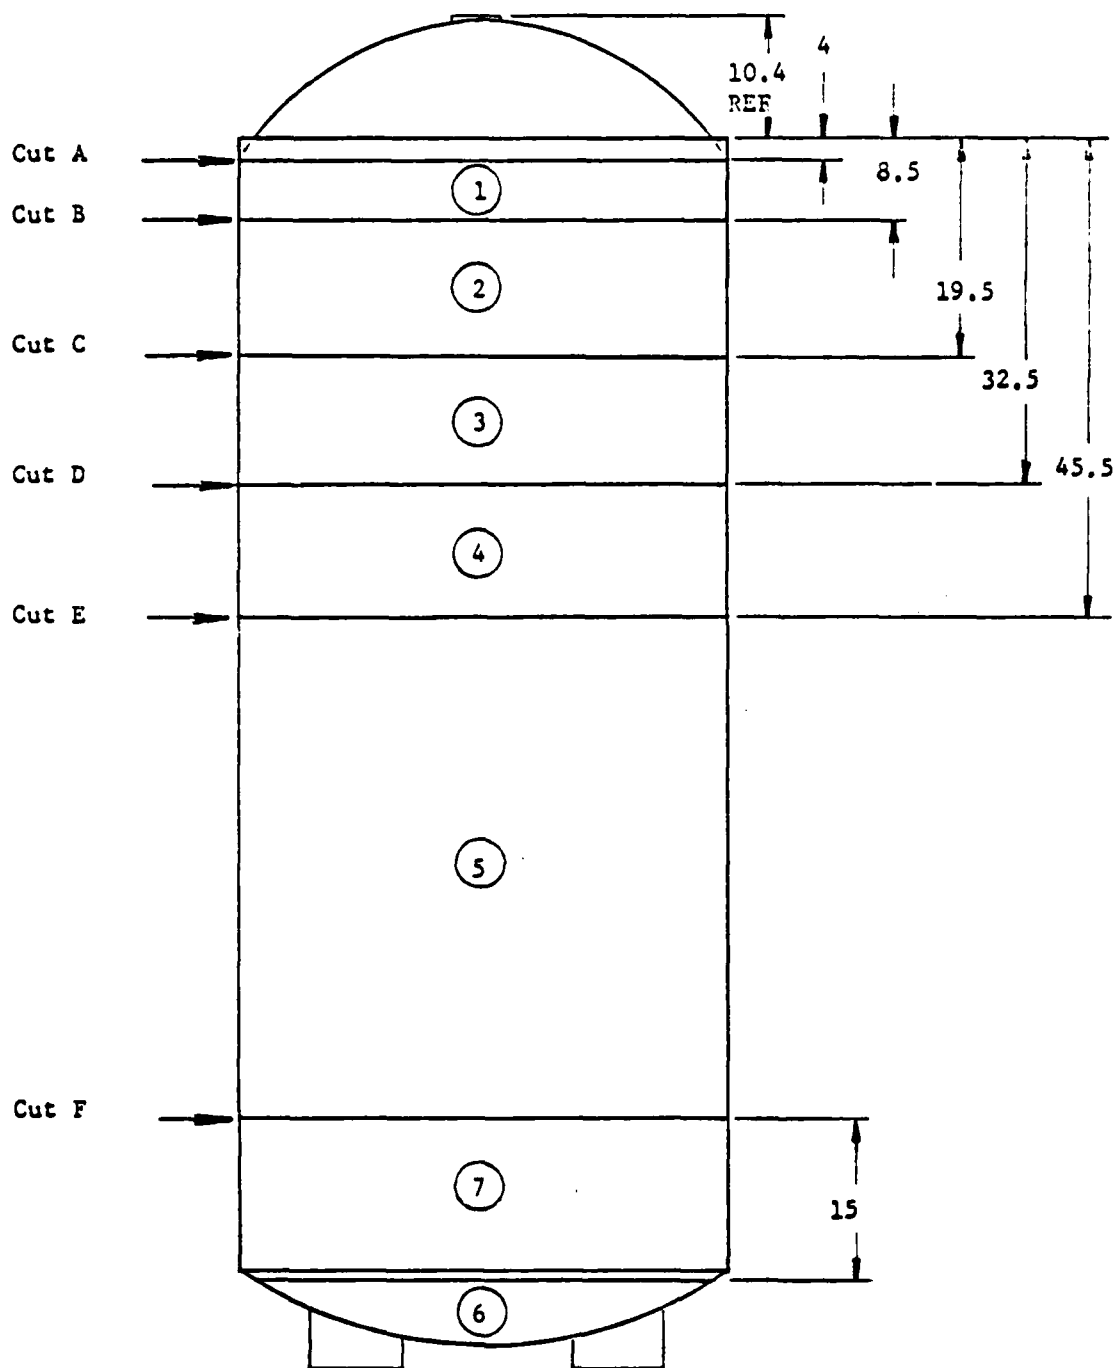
Dissection layout of Cuts, Locations and Section Numbers
